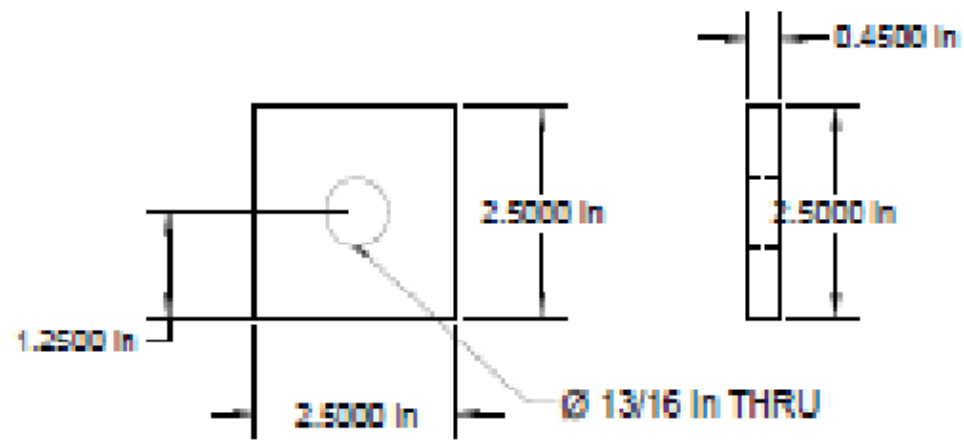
Shop drawings for cracking frame parts 5:9
